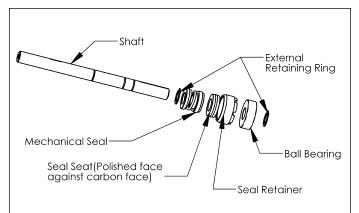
Shaft, Seal and Bearing Assembly (detailed view)
